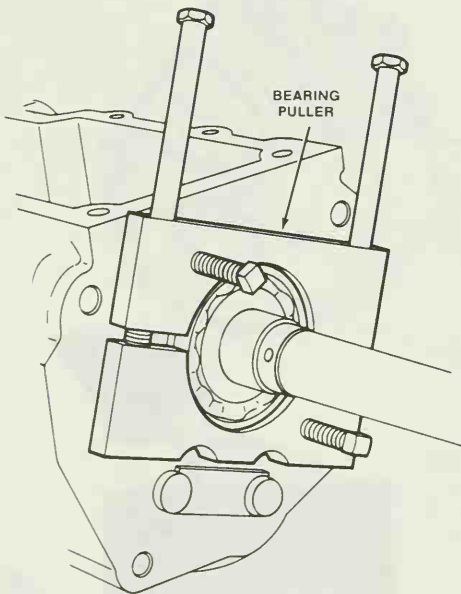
A puller is used to remove the rear bearing. (American Motors Corporation)
